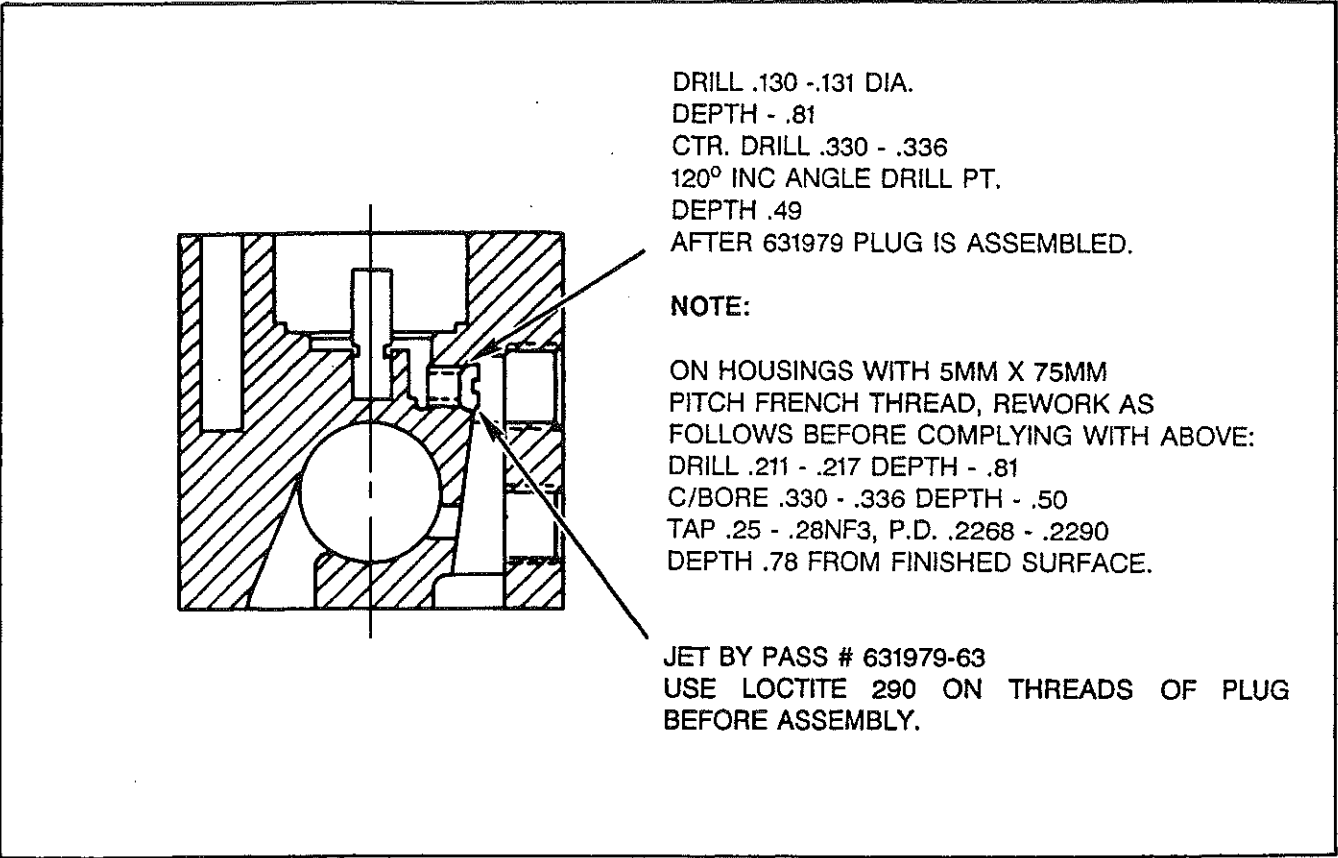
A. REWORK OF NO. 629372 VAPOR SEPARATOR AND RELIEF VALVE HOUSING.
